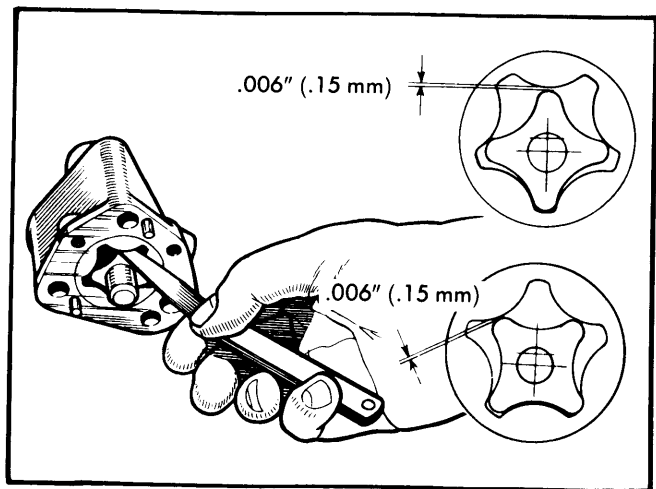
Measuring Oil Pump Rotor Lobe Clearance
